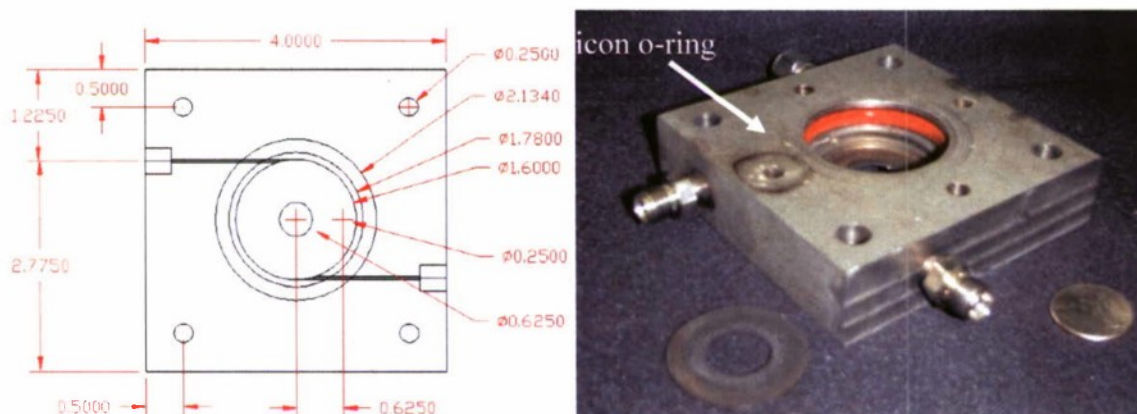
303 Stainless steel inlet plate (dimensions in inches).
